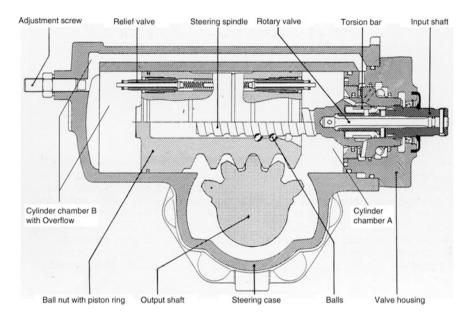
Ball-recirculating gear with nut in a cutaway view
